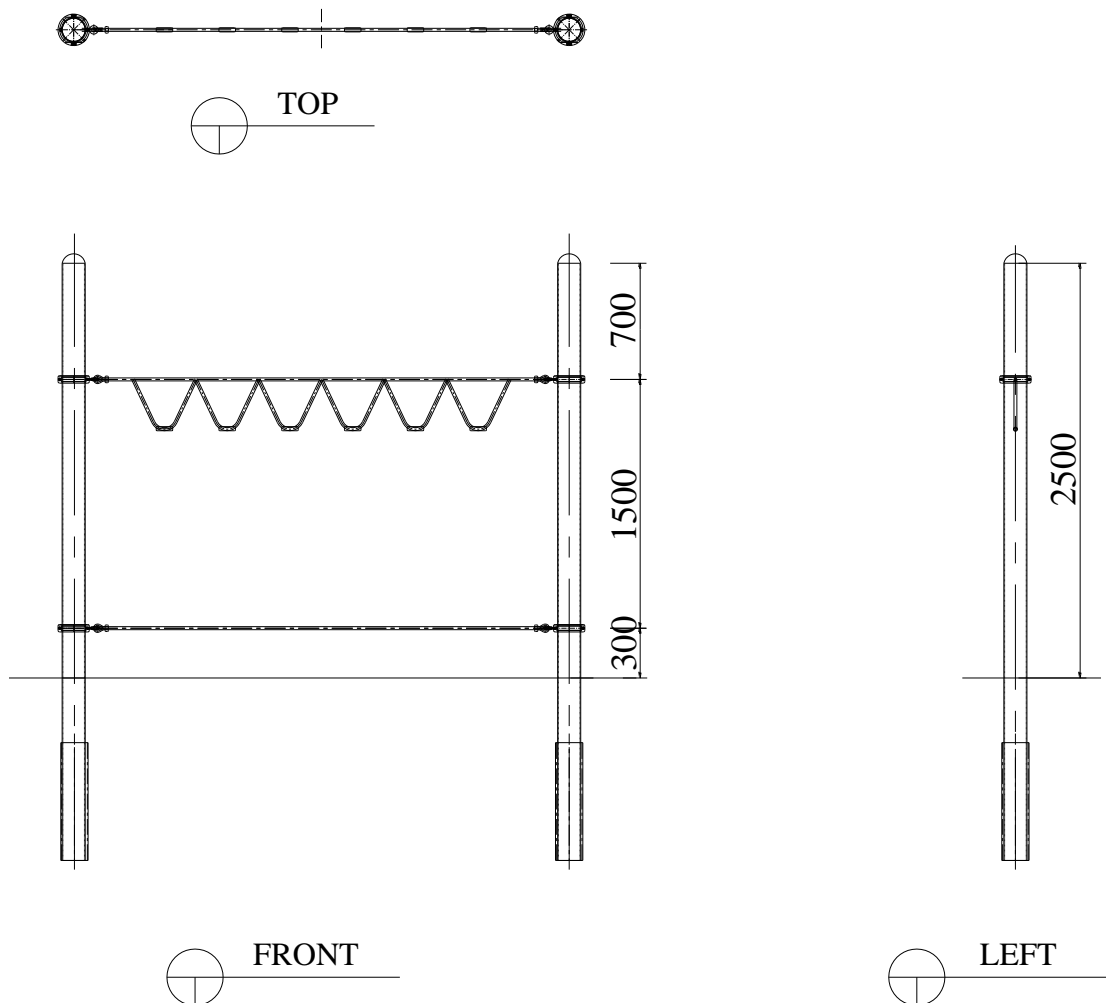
Assemble GSWeb clamp in the attach with stainless steel post
